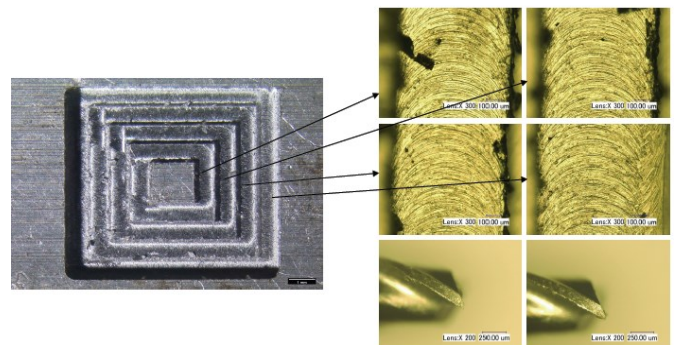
Machining of Aluminium at $f = 30$ mm/min and D.O.C. = 0.3 mm (Run #11 in Table 2): Pyramid Shaped Structure (at left) Micro Slots and Cutting Tool (at right)
